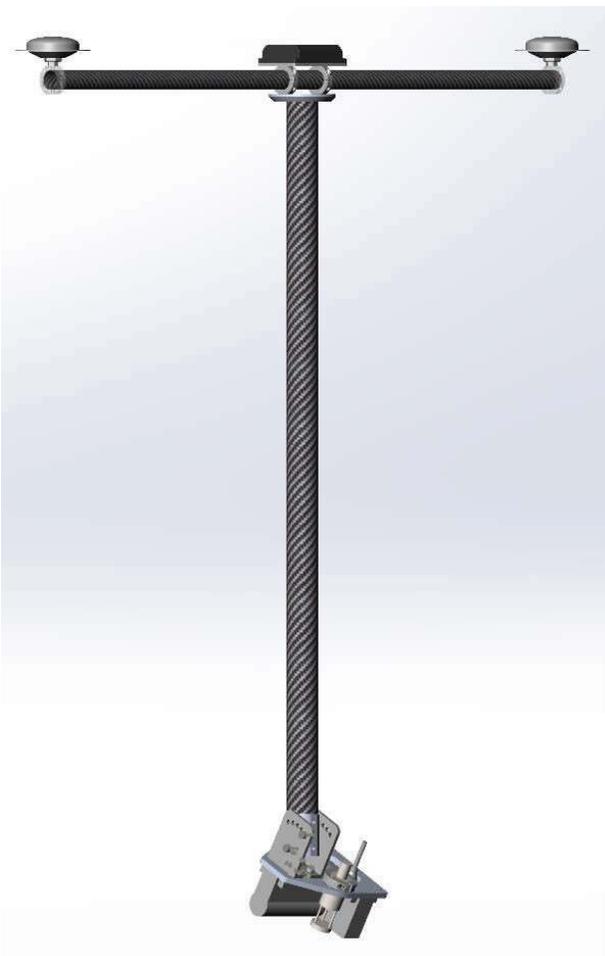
Antenna bar and PicoMBES 120 sensor assembly CAD model. The CAD model shows a 30-degree tilt of the PicoMBES 120 sensor assembly.
